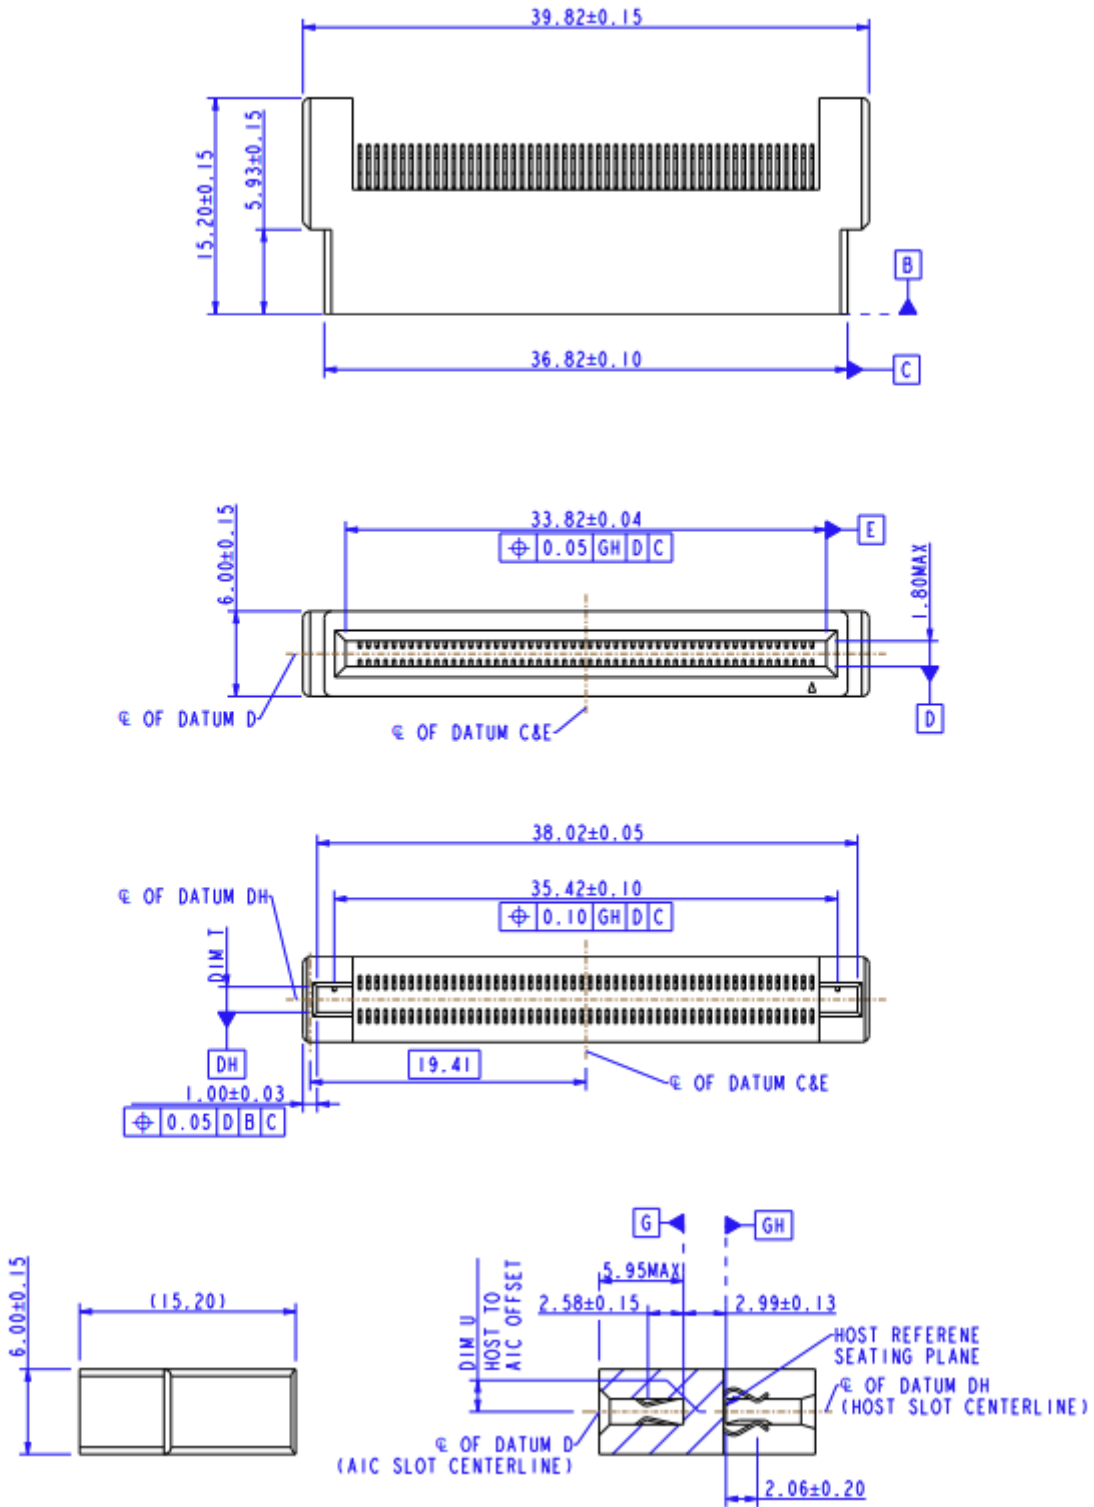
Straddle Mount PMM x16 108pin Connector Dimensions
